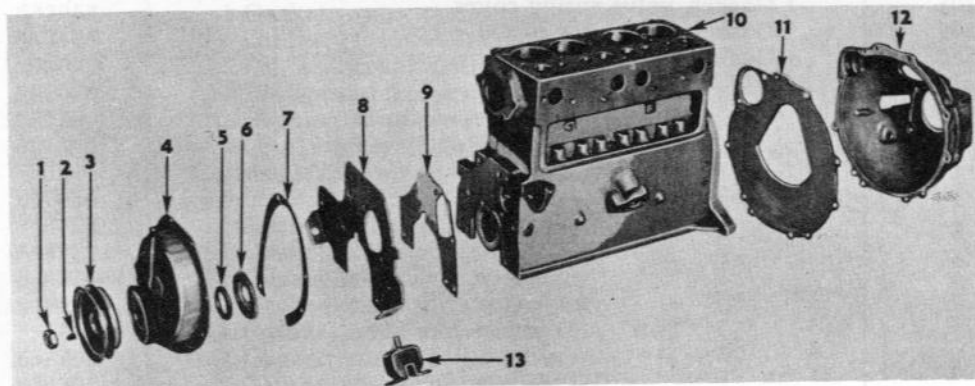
CYLINDER BLOCK, FLYWHEEL HOUSING
